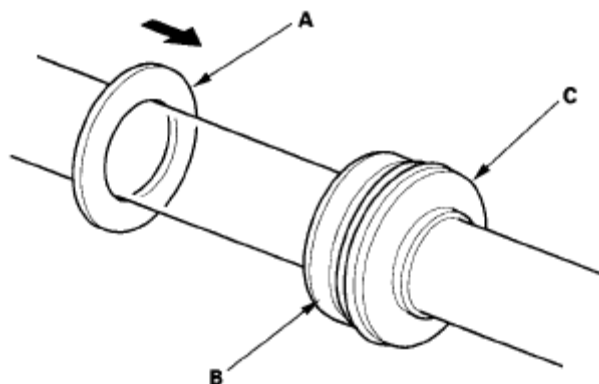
Identifying Cylinder Seal Onto Steering Rack With Grooved Side
